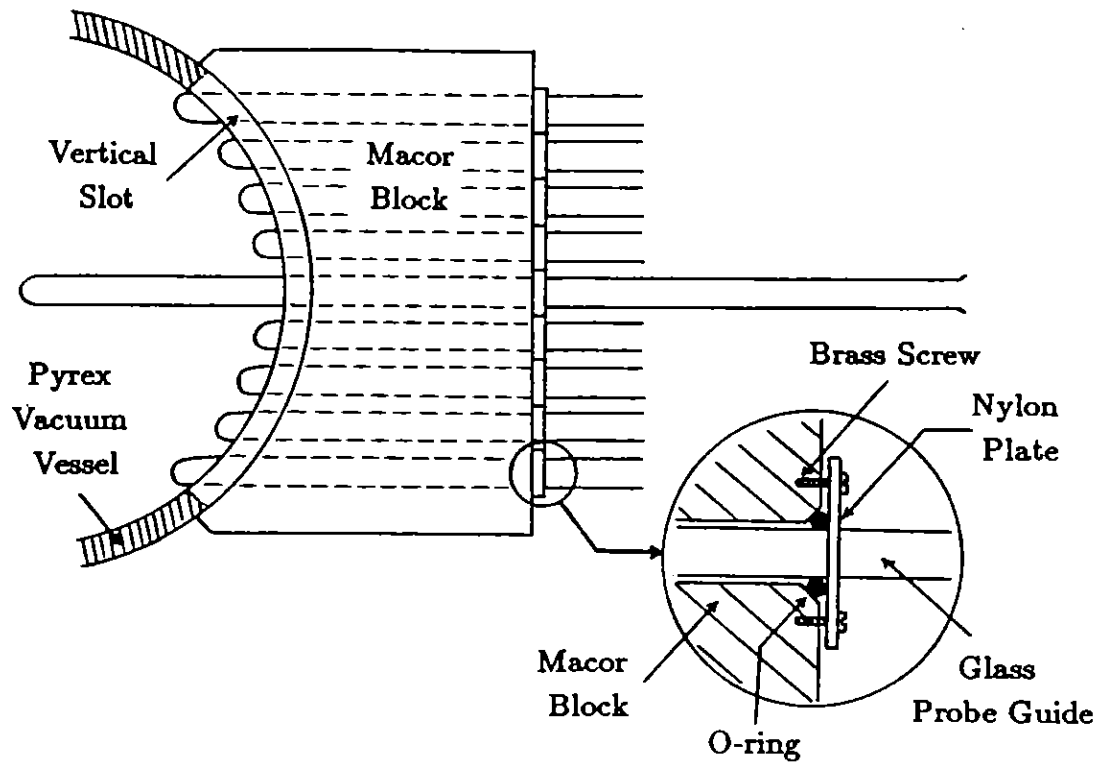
A schematic diagram of the Rythmac-2 Macor Block horizontal probe guide array. The probe guide spacing is 1cm. Two very similar Macor blocks were incorporated into the design of Rythmac-3. These Macor blocks contained 13 probe guides and O-ring cover plates machined from aluminium rather than nylon.
